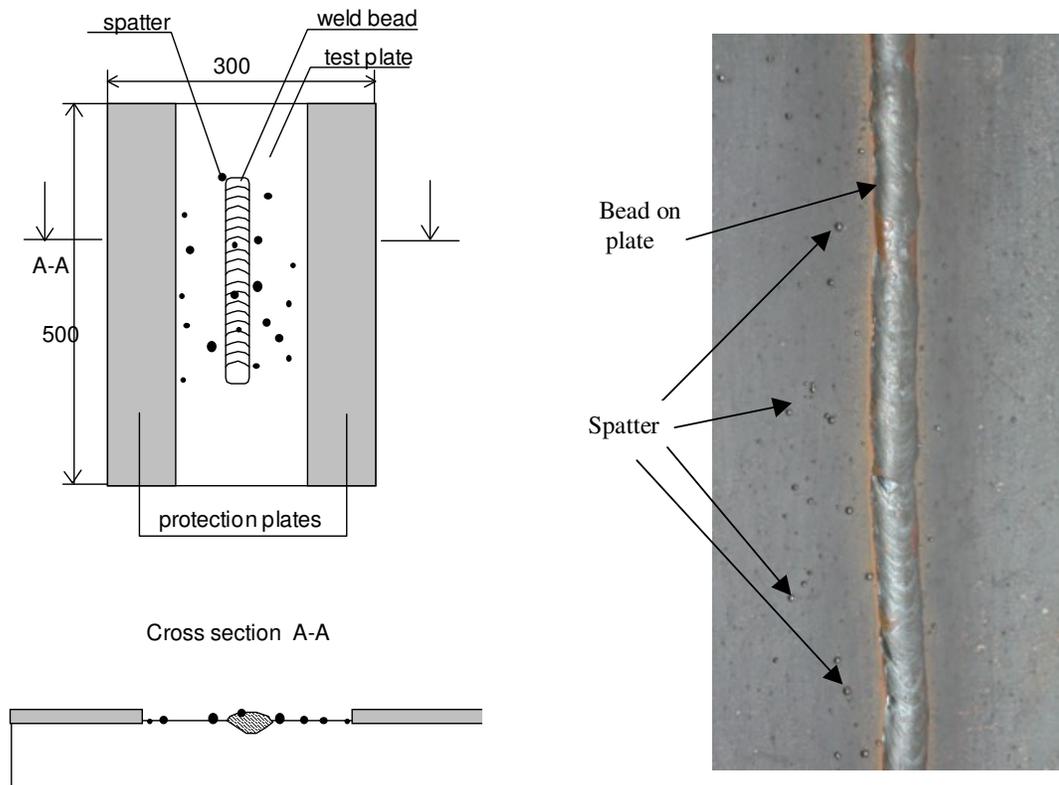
Design of the experiment for surfacing of a test plate (left) and a detail of spatter obtained for a MAG welding with solid wire and Ar+CO₂ shielding gas. Dimensions of the surface with the spatter are 65 mm by 110 mm.
